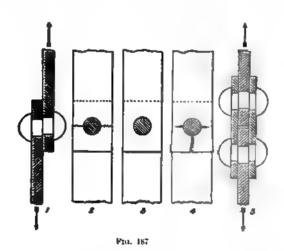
shows the various ways in which we may imagine a strip of plate or the rivet which corresponds to it to break (1) the rivet breaking in single shear, (5) in double shear.
